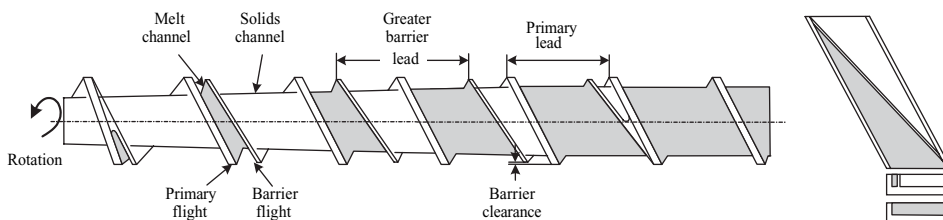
Schematic view of the Maillefer barrier type screw.
